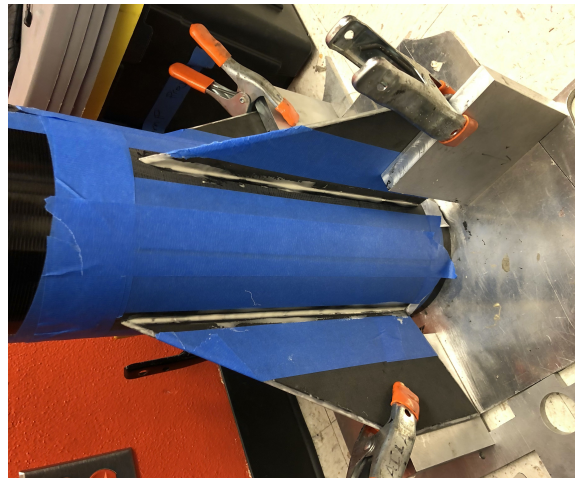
Initial Fin Placement using the Fin Attachment Jig
